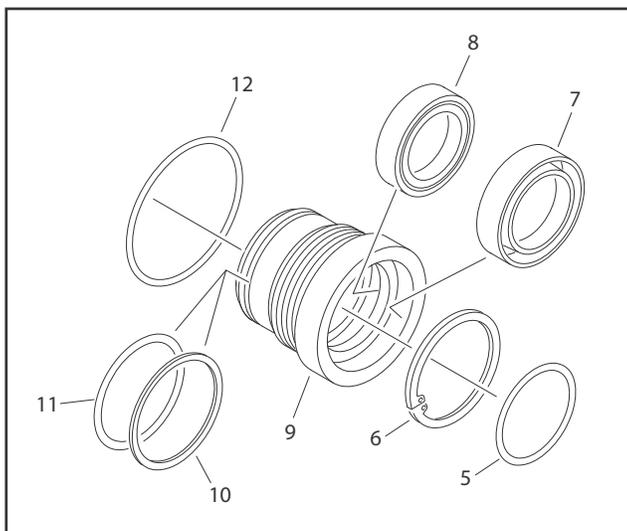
Axle Lockout Cylinder (Inside Frame)
